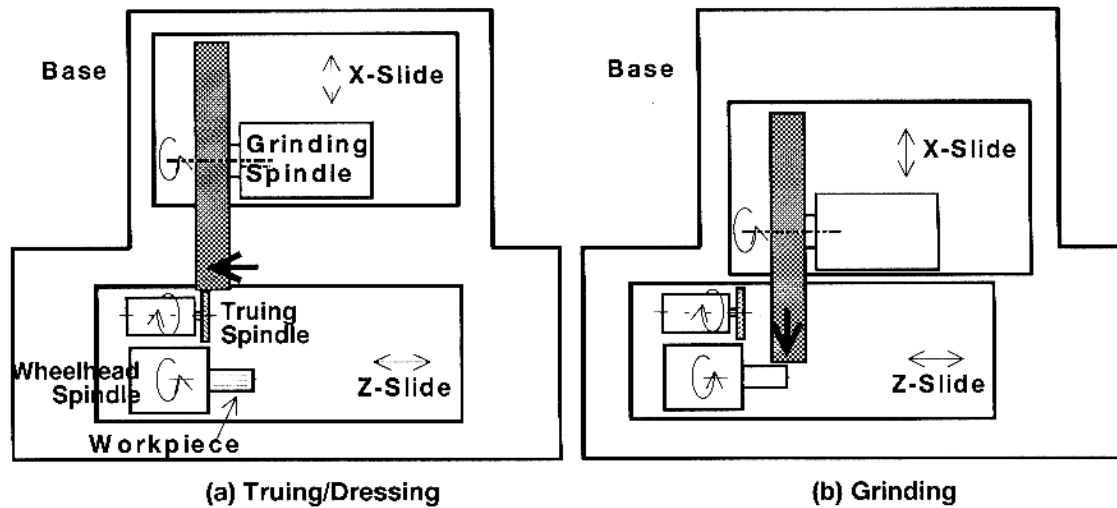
Configuration of the truing and grinding in a Weldon AGN5 CNC cylindrical grinding machine.
